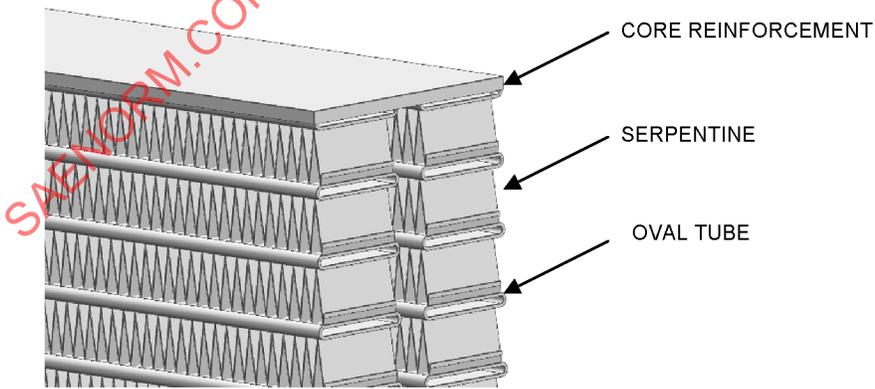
TYPICAL AUTOMOTIVE STYLE TUBE AND SERPENTINE FIN CORE
